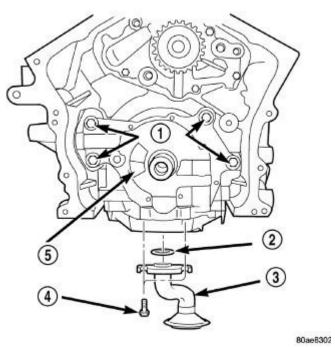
Oil Pump & Pick-up Tube Courtesy of CHRYSLER LLC
